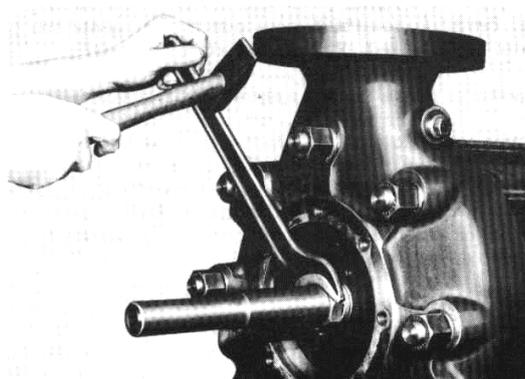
Slackening shaft protecting sleeve (524.2)
